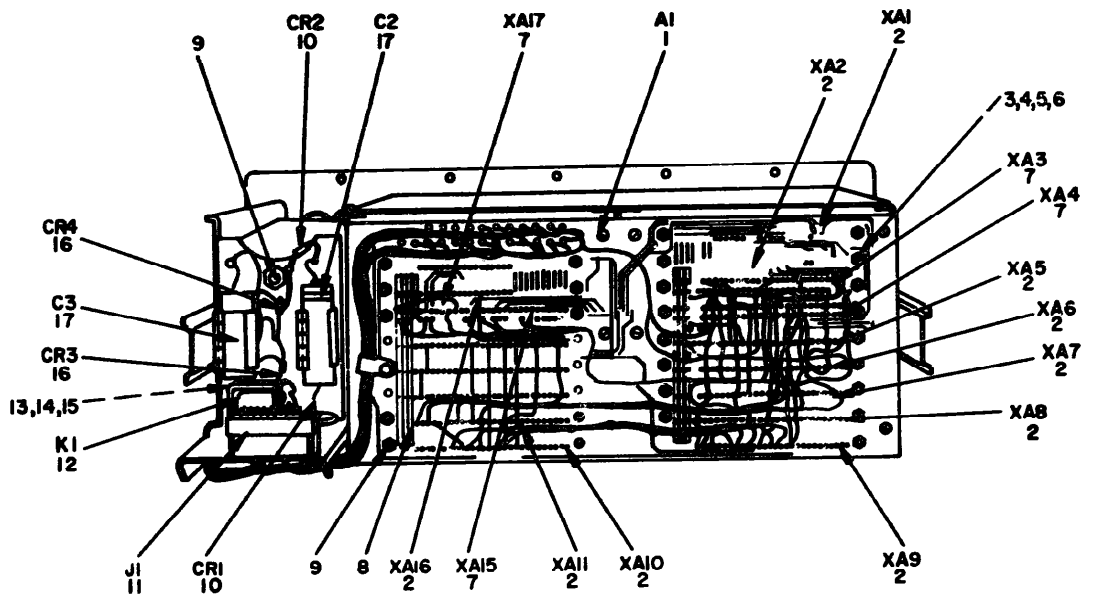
Alarm-Monitor Chassis Electrical Assembly (1A16)
